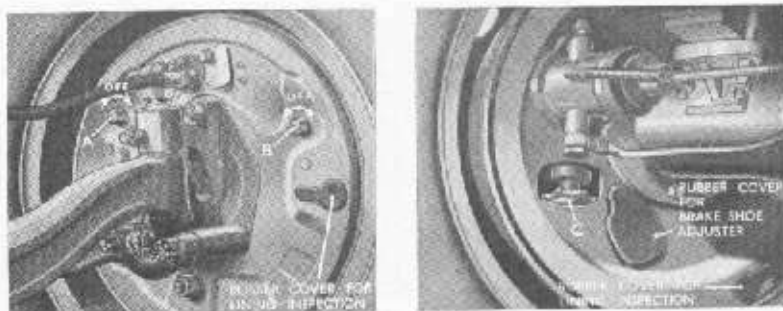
Brake shoe adjusters—(left) front brakes; (right) rear brakes.
